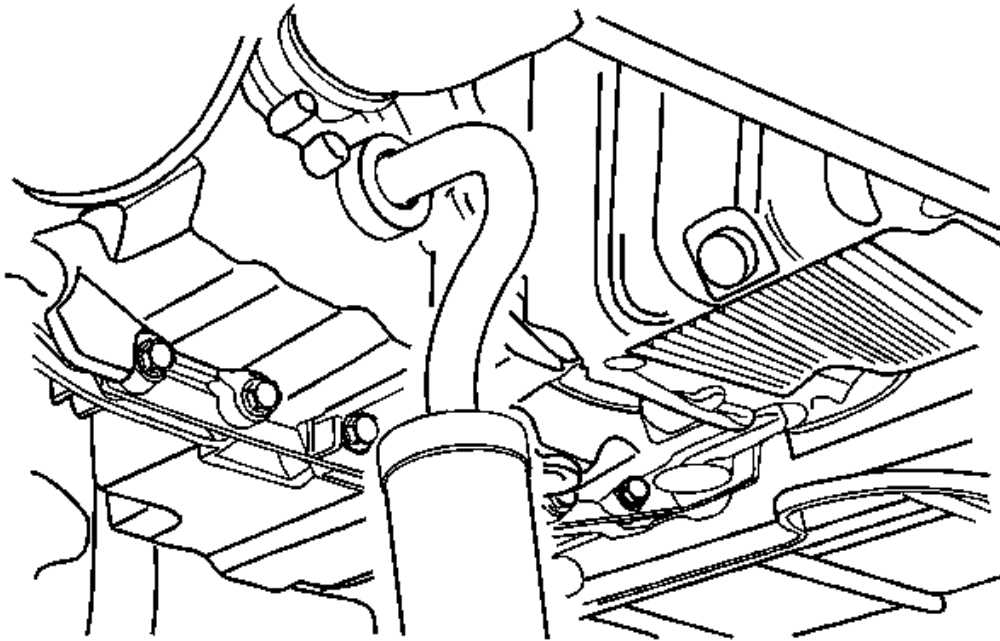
Front Wheel Drive Shaft Seal - Torque Converter Housing Side
